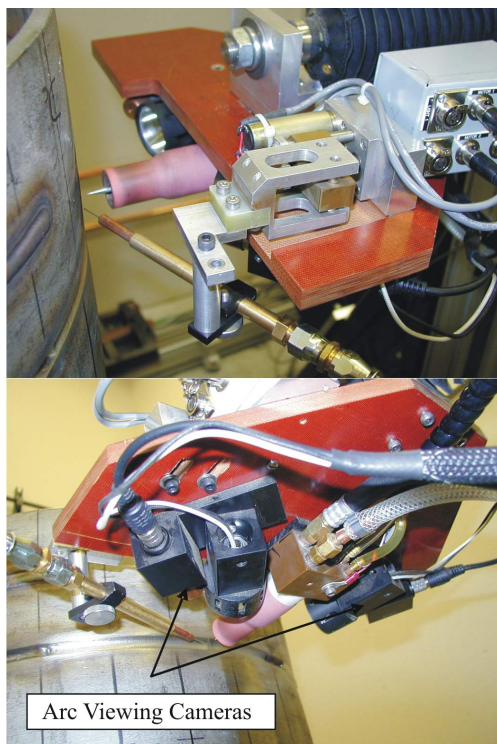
Top view (top) and underside view (bottom) of the welding end effector positioned over a typical SNF canister weld joint.
